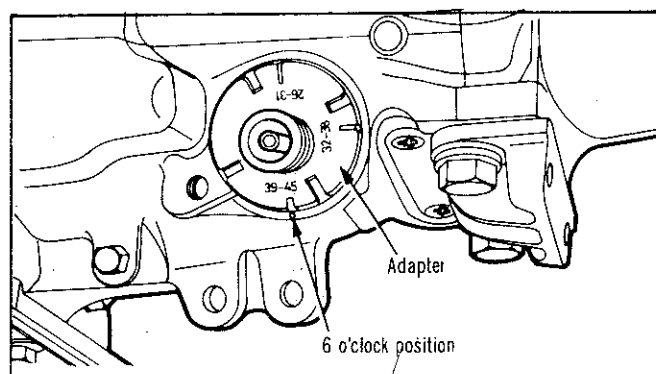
Speedometer pinion and adapter installed (Retainer removed for view)
